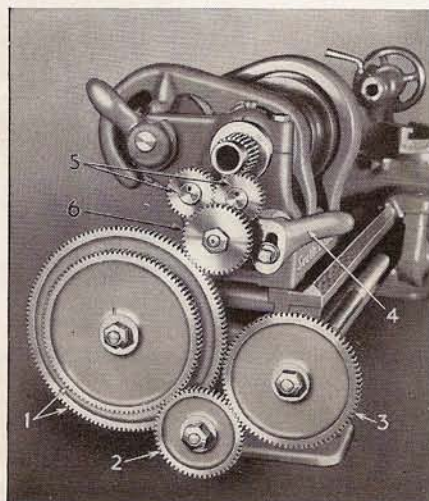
9-inch "Workshop" South Bend Metric Lathe Set up for Cutting Metric Screw Threads. (Gear guard of lathe removed to show gearing.)
